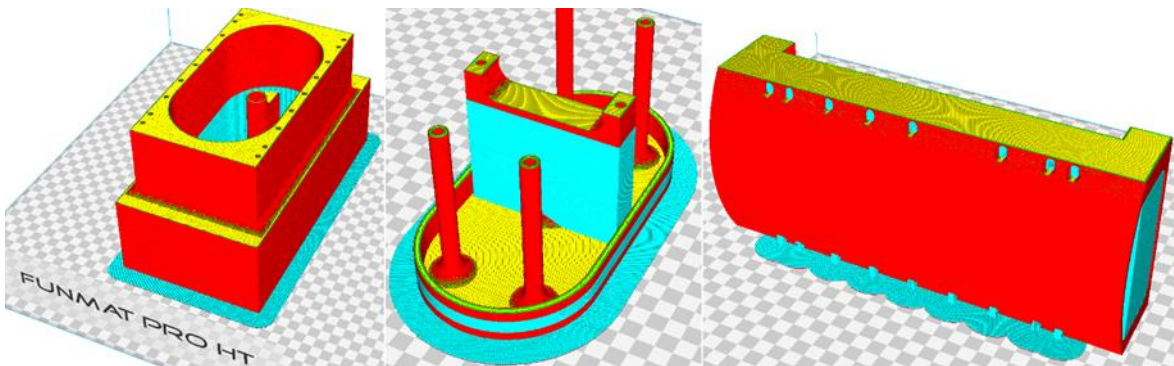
An illustration of sliced pump parts; casing, piston and manifold.
